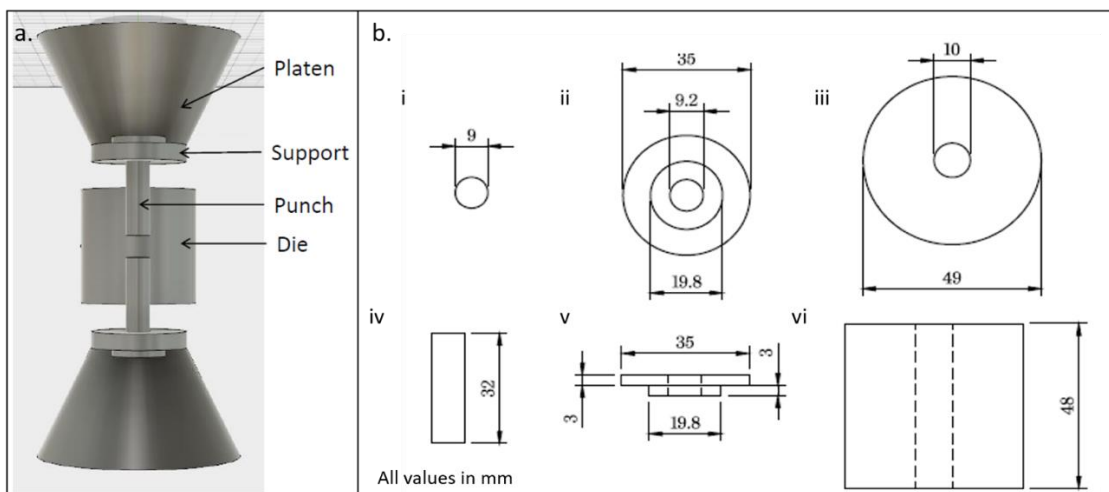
a) CAD diagram of FAST mould set up and b) specifications for 9 mm diameter moulds (prototype 1): Top view of i) punch ii) support and iii) die. Side view of iv) punch v) spacer and vi) die [9].
